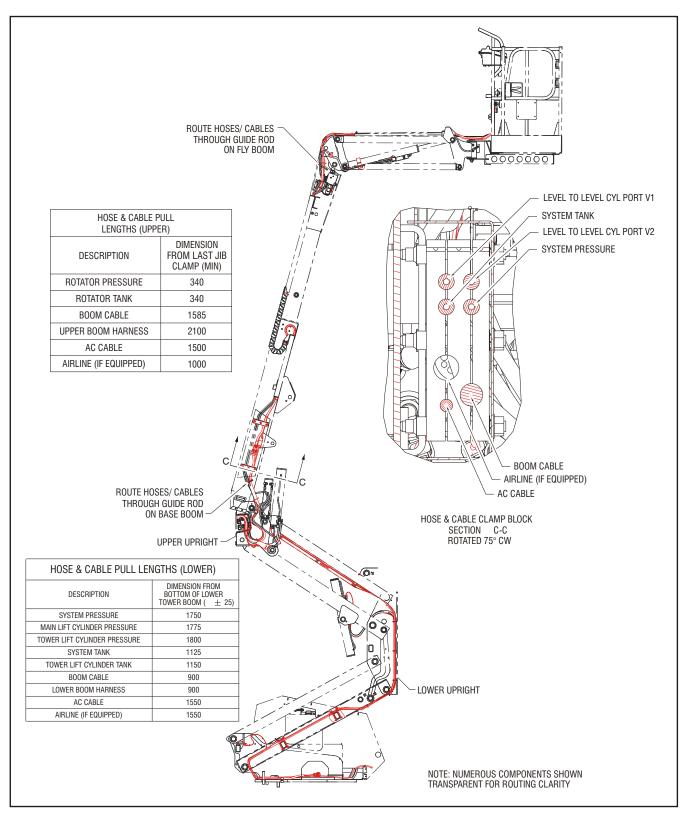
Cable Installation and Identification - Sheet 1 of 8
